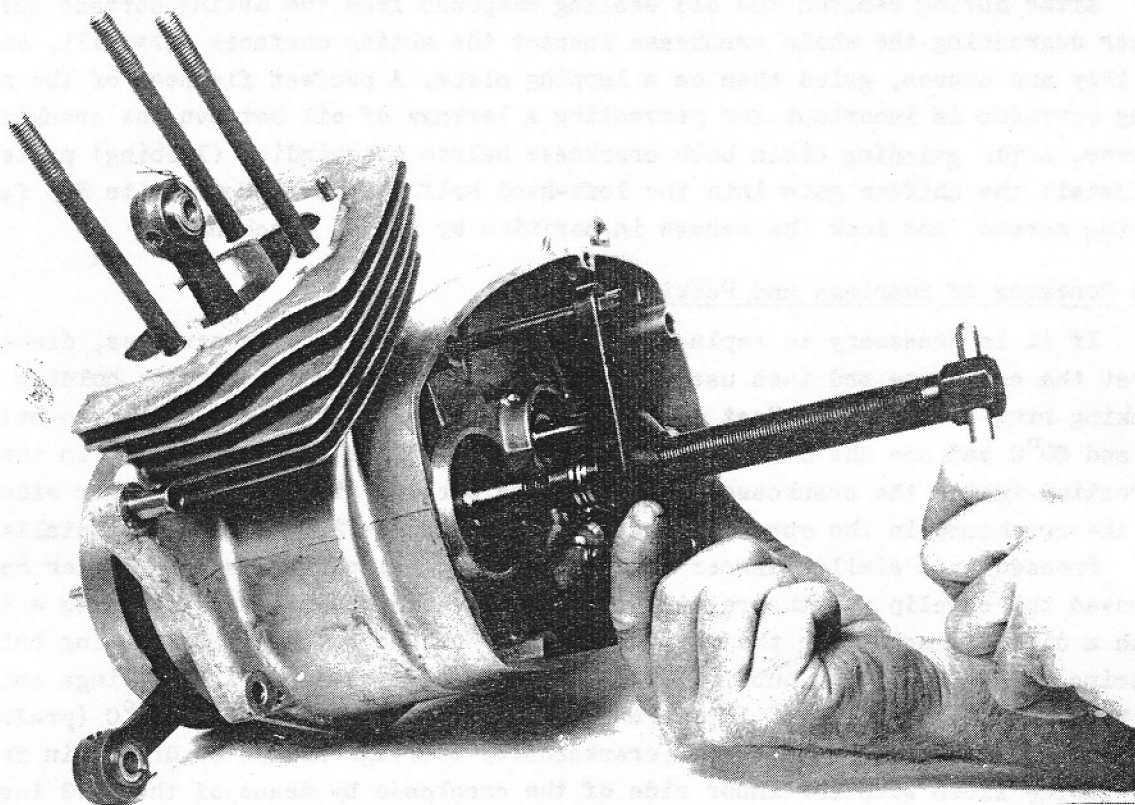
Pressing crank mechanism out of crankcase left-hand half
